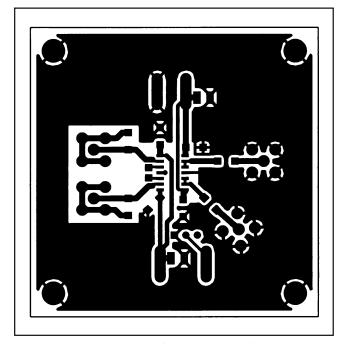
MAX4147 EV Kit PC Board Layout—Component Side
